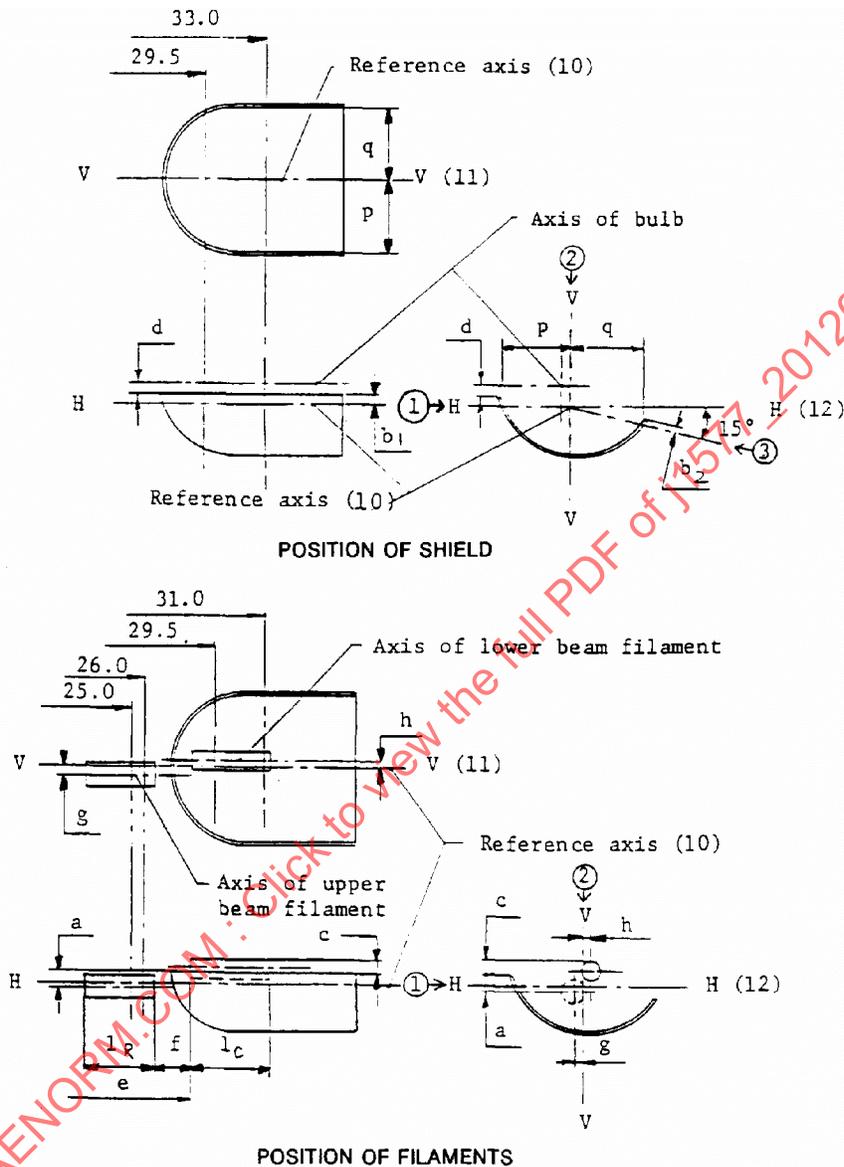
TYPE HS1 REPLACEABLE MOTORCYCLE HEADLAMP BULB—
